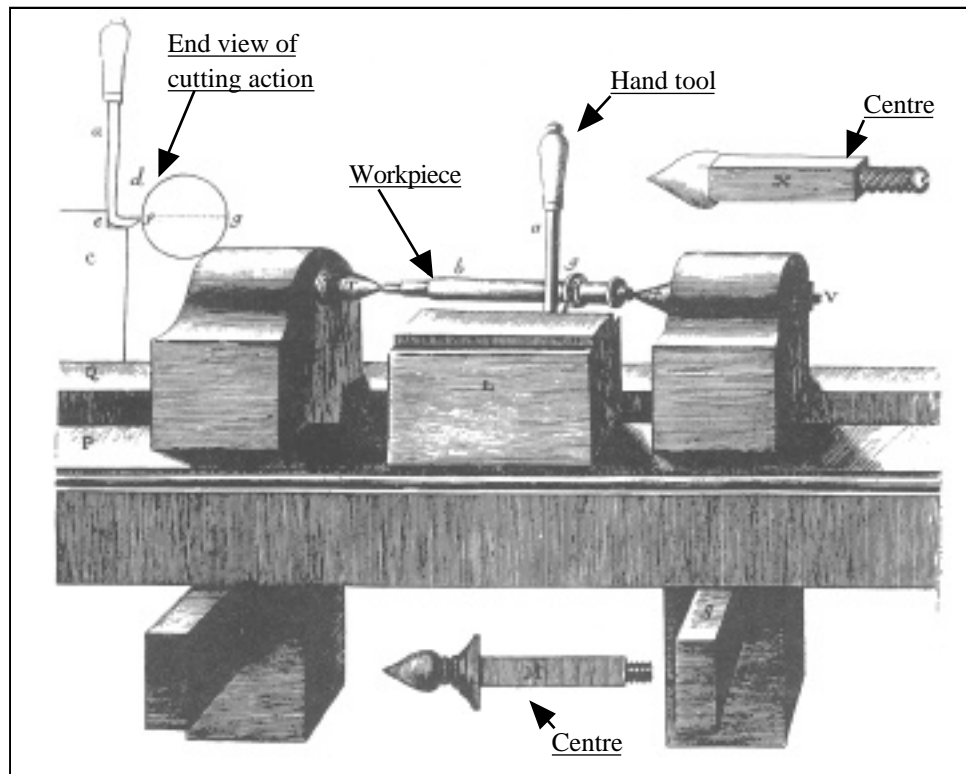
Plumier's iron-cutting Lathe, 1701
